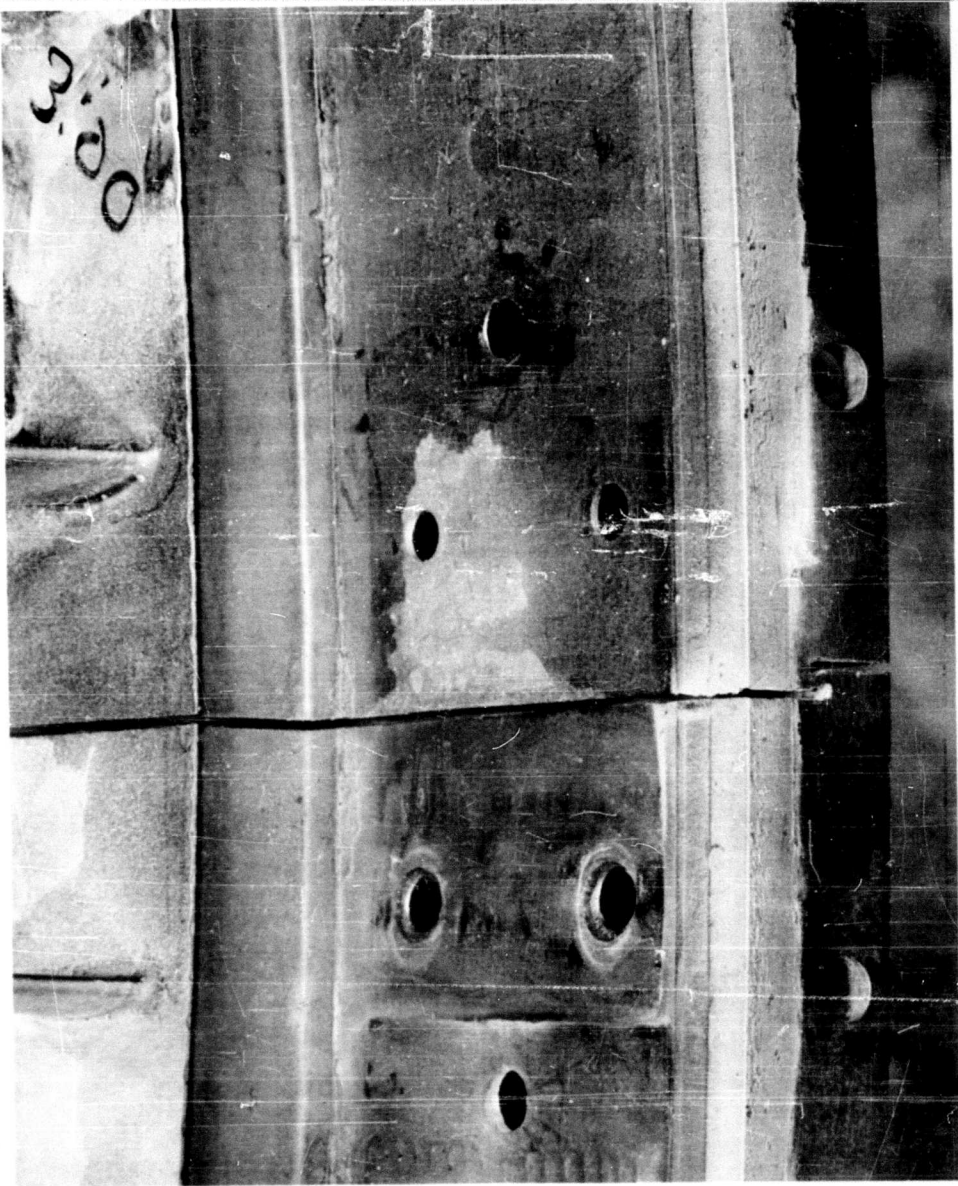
AFT FRAME SAW CUT COMPRESSION
